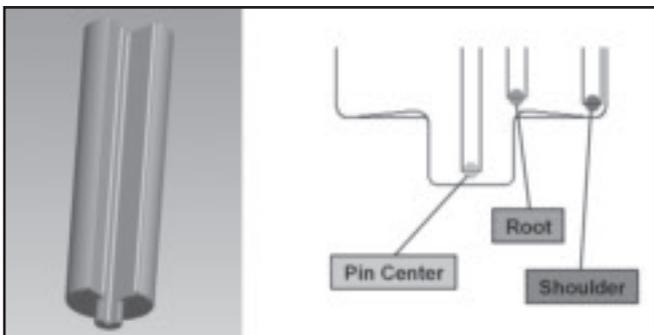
Thermocouple locations in the tool. Note: Threads are omitted for simplicity.
